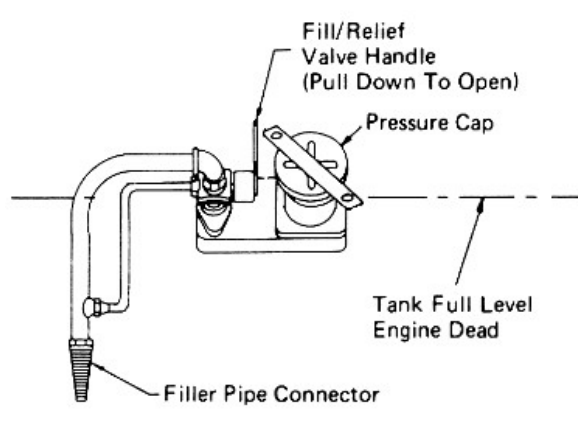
Cooling System Pressure Cap And Filler Relief Arrangement
